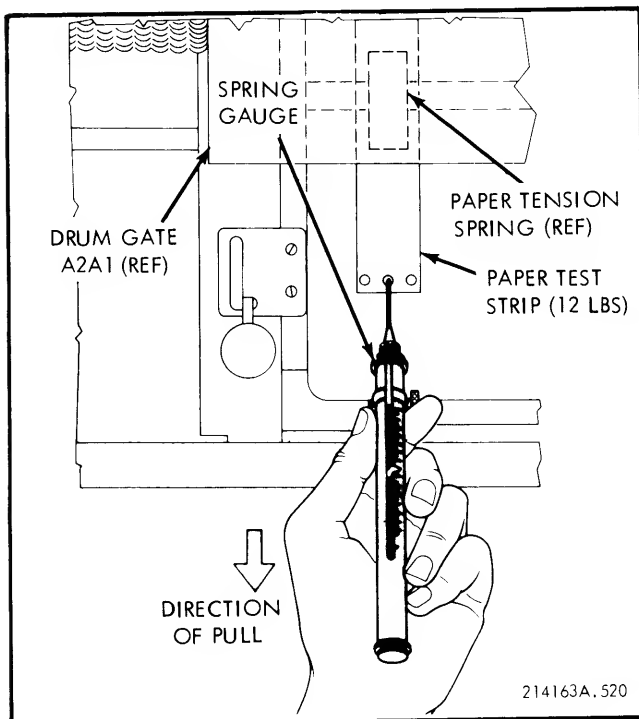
Spring Gauge Test of Paper Tension Spring
